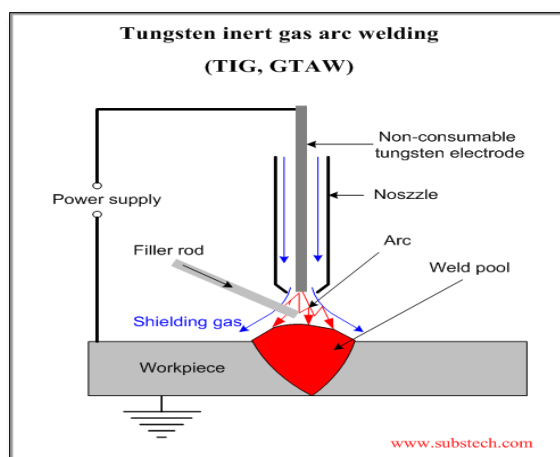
Tungsten Inert Gas (TIG) Welding
